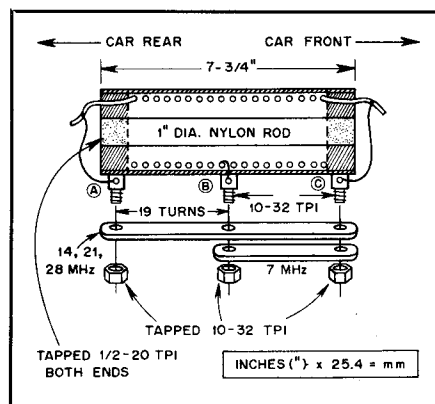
The main loading coil (L3) assembly. This coil is used on 3.5 and 7 MHz only. L3 consists of a total of 55 turns of no. 14 gauge wire wound on a 2-1/2-in. (63.5 mm) diameter form at 8 tpi. The inductor is enclosed in a 3 in. (76 mm) diameter, 1/8 in. (3 mm) wall Lucite tube. End discs are made of 1 in. (25.4 mm) thick Lucite. The brass shunt bar is placed across threaded studs at B and C, leaving a total of 19 turns of wire for 7 MHz operation; the entire coil is used on 3.5 MHz. Another bar, connected from A to C, shorts out all of L3 for 20-, 15- and 10-meter operation.
